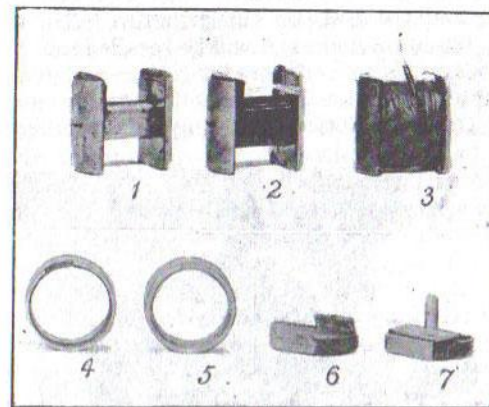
Component Parts of a Thomson-Bennett Armature.
